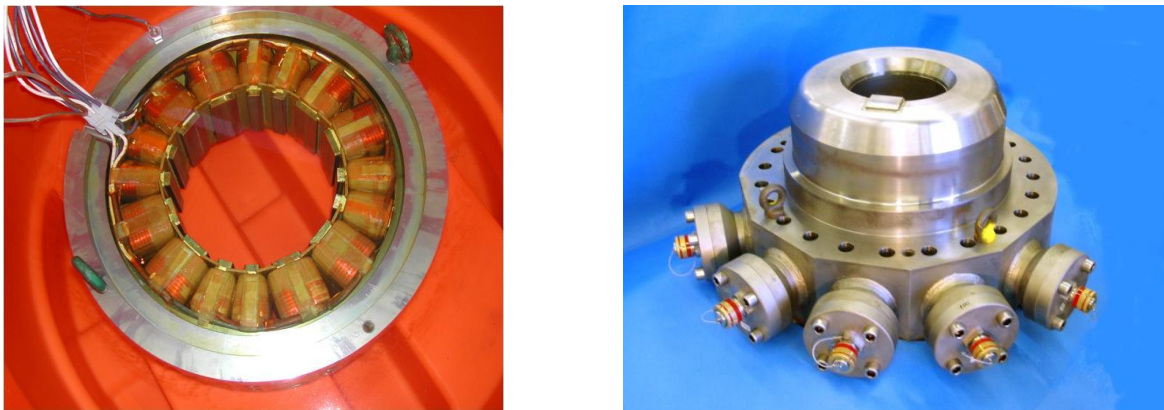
Sealed (left) and canned (right) magnetic bearings
